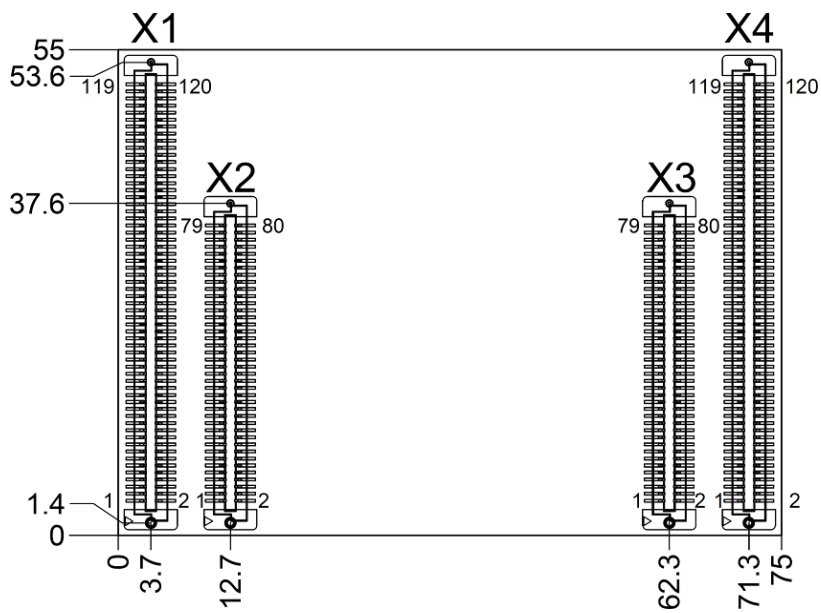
TQMa57xx dimensions, top view through TQMa57xx
